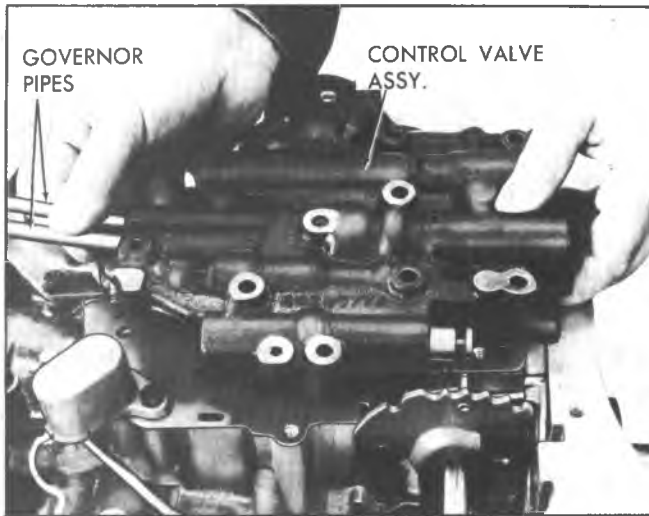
A-10C--Removing Control Valve Assembly and Governor Pipes from Case
